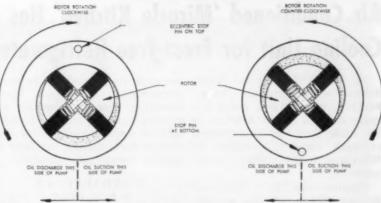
Oil pump must be reversible to insure compressor lubrication regardless of direction of motor rotation.
